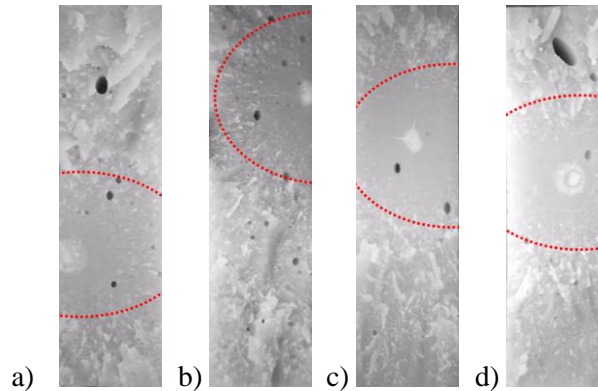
Fracture surface of specimens at 5mm/min; a) Ref_005_02, b) R20_005_05, c) V20_005_02, d) V90_005_01 – Scale: entire specimen cross section (4×13 mm²)
